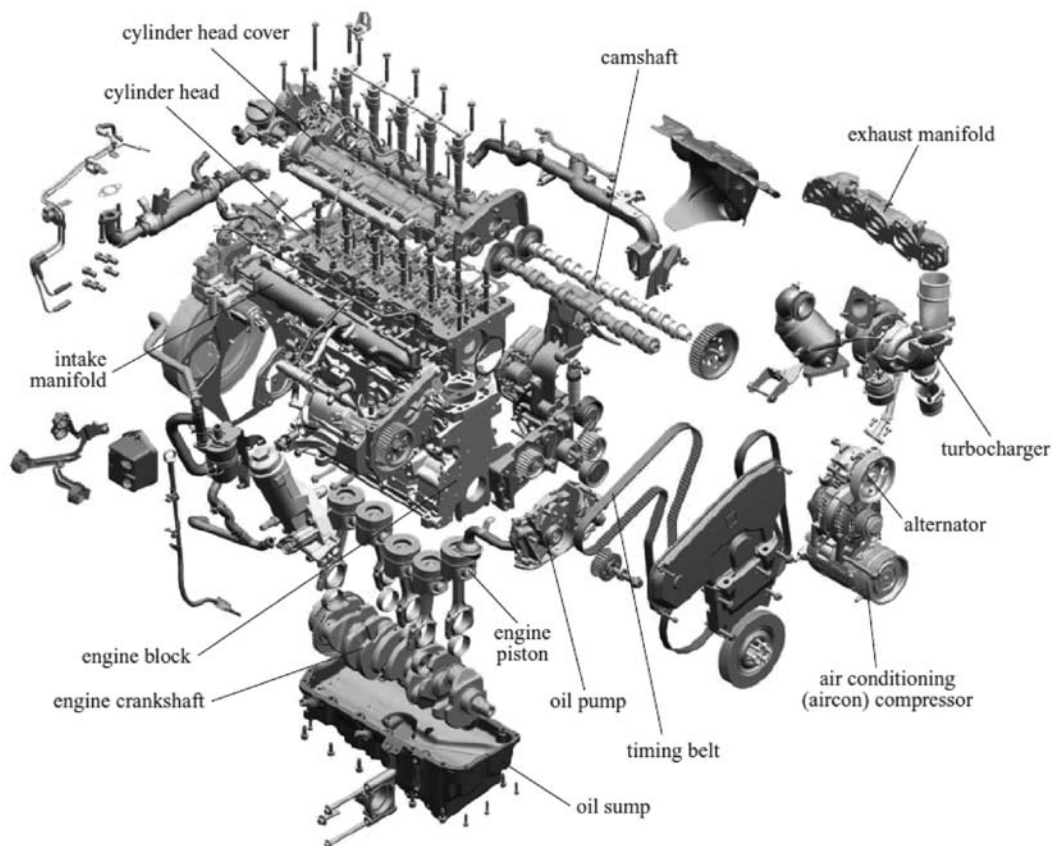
Expanded view of an engine (a turbo-charged diesel engine, FIAT 5 in-line cylinders). *Source:* Figure courtesy of FIAT.
